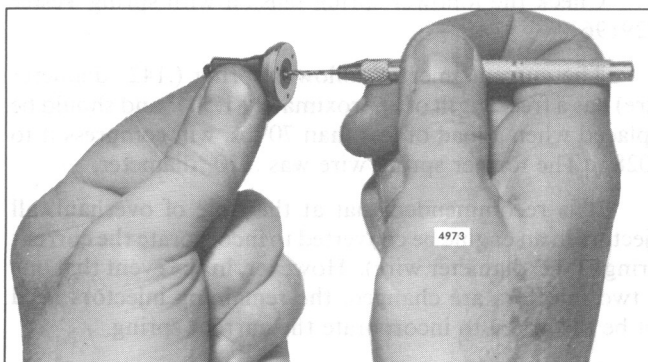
Cleaning Injector Spray Tip with Tool J 24838
